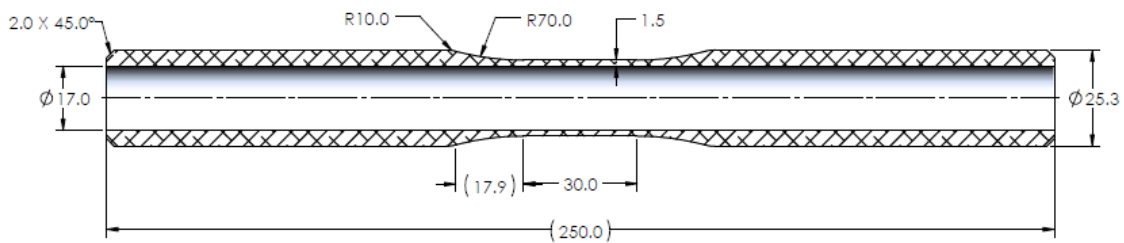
Design of tubular specimen used in bending-torsion fatigue. All dimensions are in mm.
